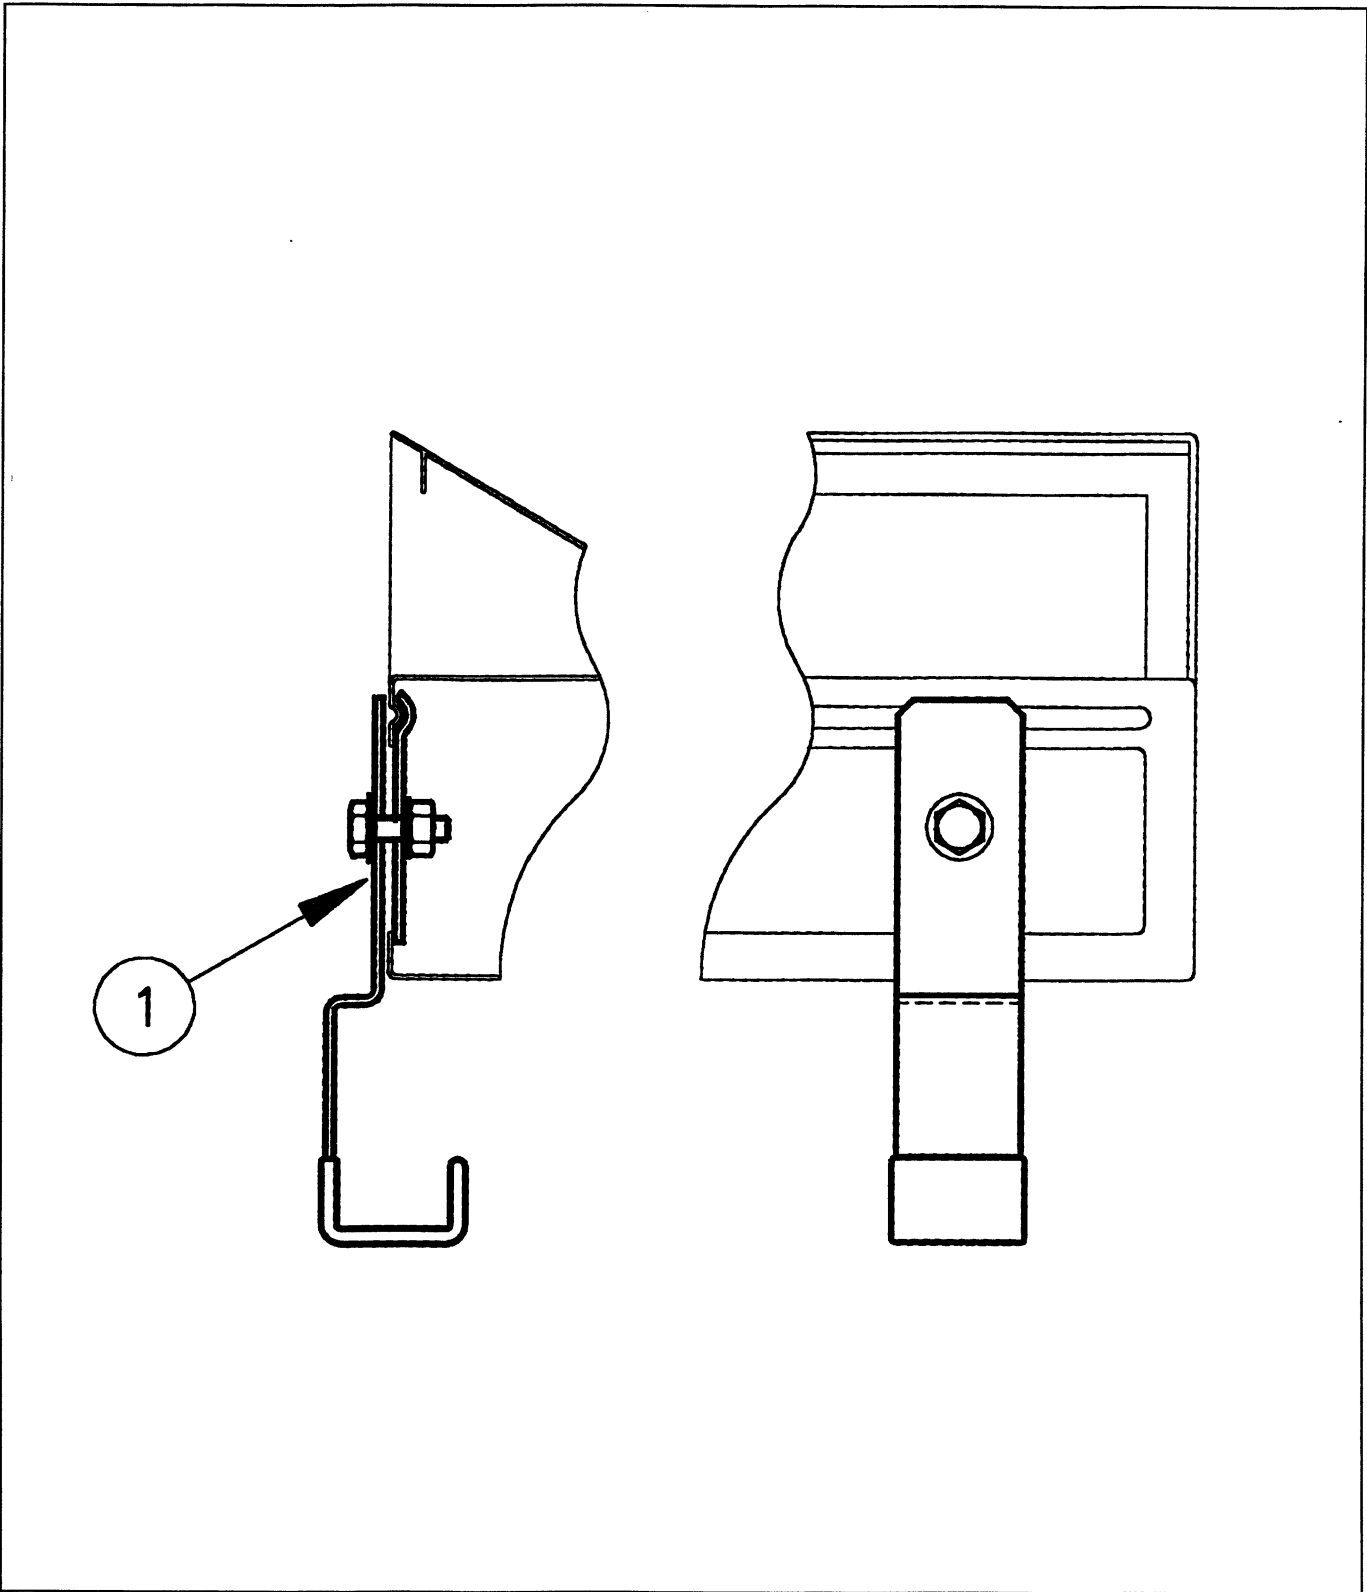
(Sheet 1 of 2) Bracket Mounting, Headset
